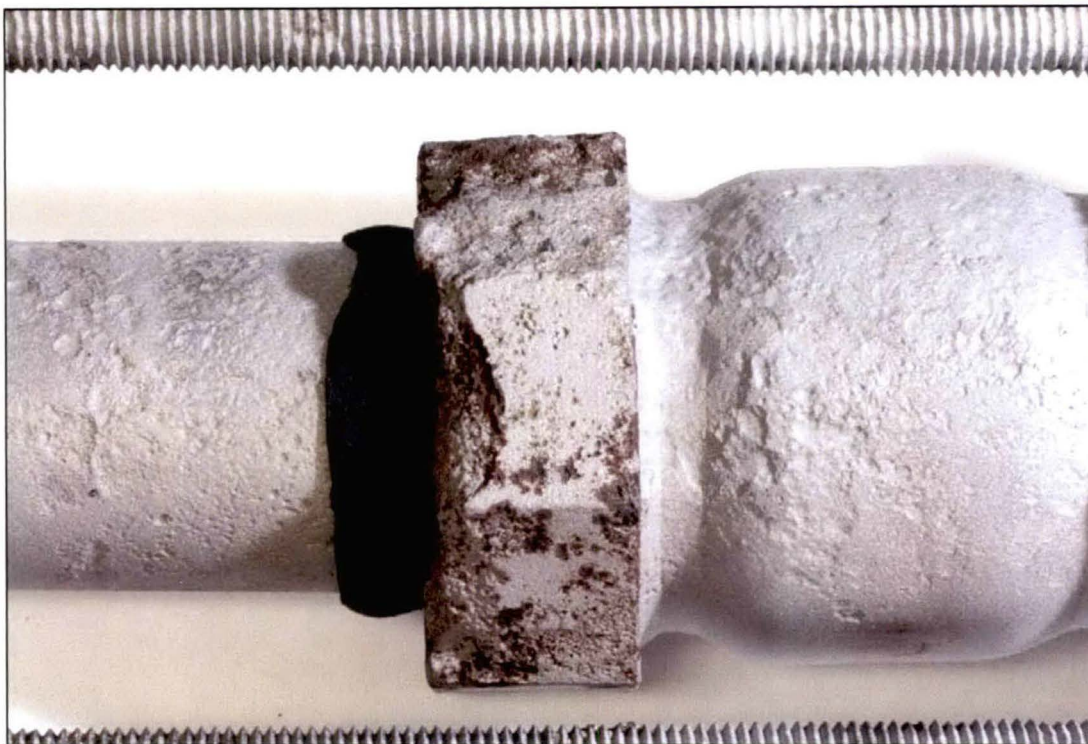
Photograph of a corroded region on the bottom of the coupling.
